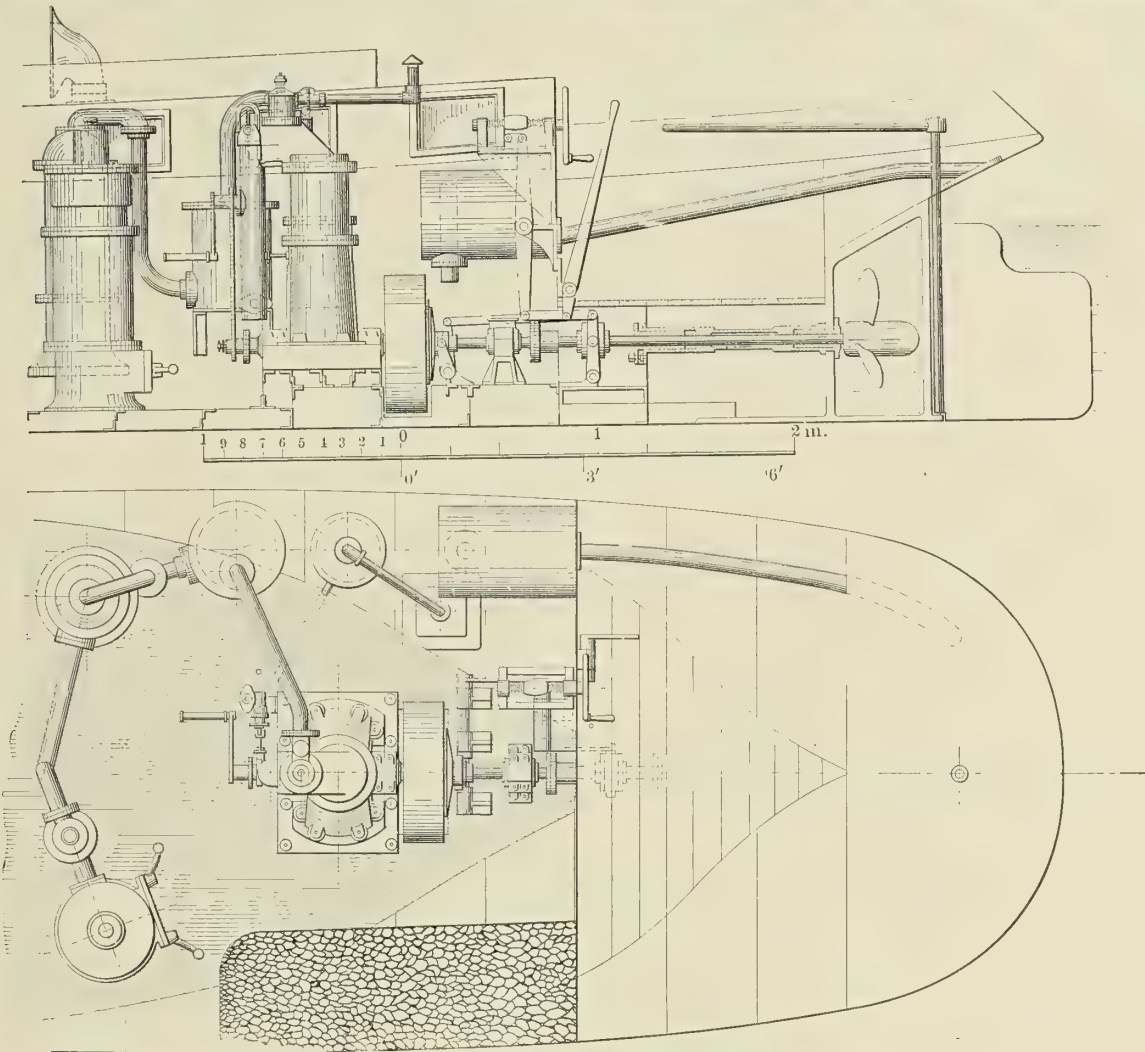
ENGINE-ROOM ARRANGEMENT FOR A 34-BRAKE-HORSEPOWER MARINE PRODUCER GAS PLANT.
